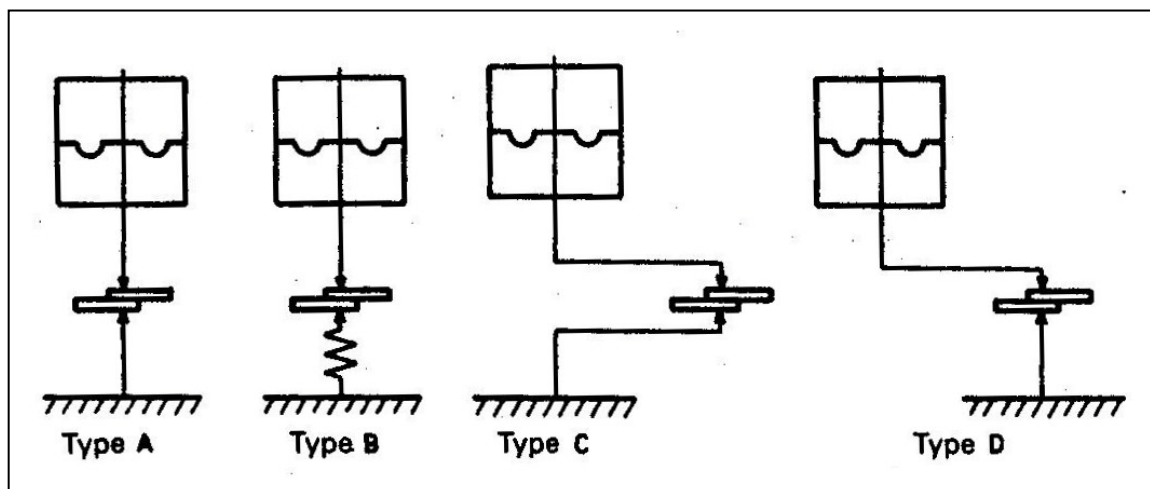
Four types of spot welding machine configuration for experimentation
